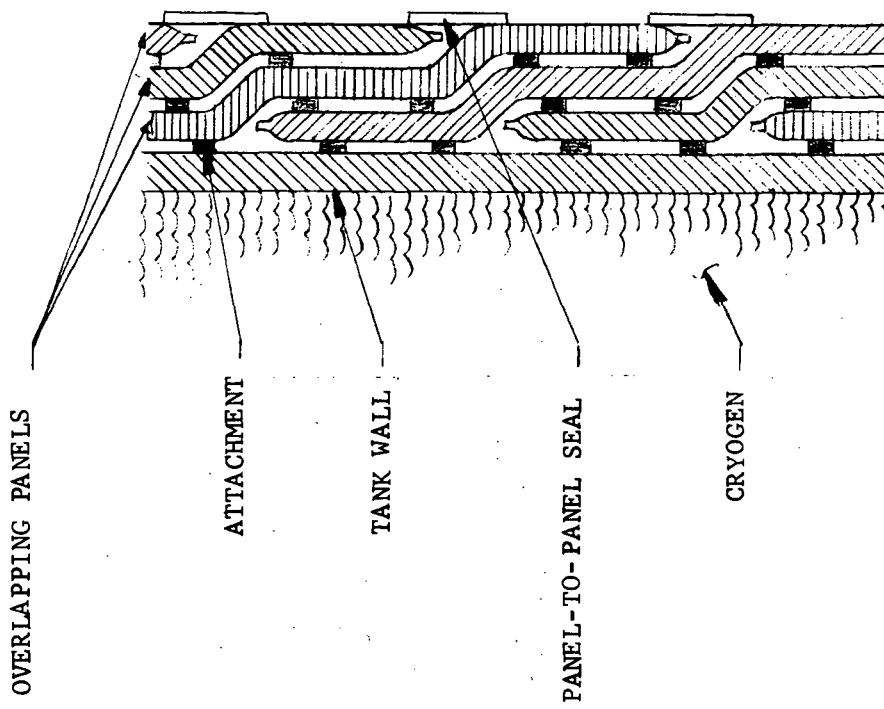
SEMI PANEL SHINGLE ARRANGEMENT INSTALLATION
